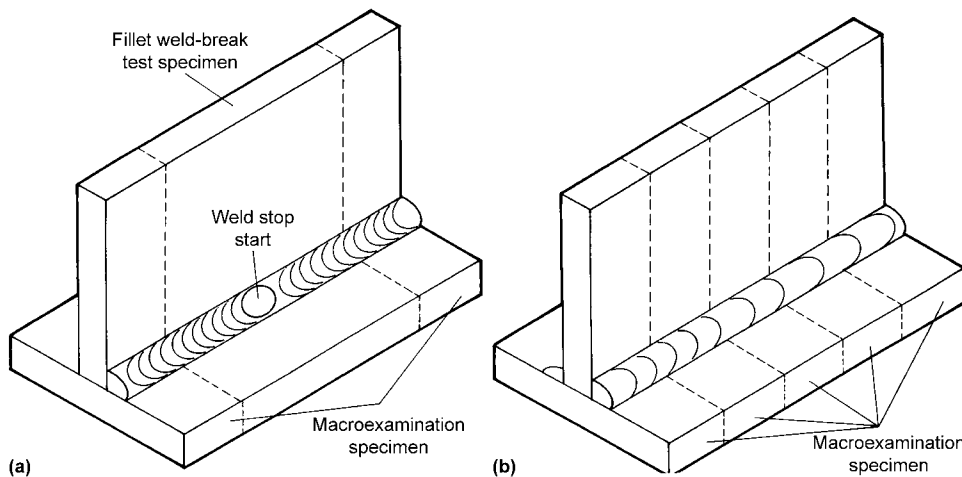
Two examples of T-joint weldments for fillet weld qualification. (a) Fillet weld on one side of T-joint. (b) Fillet weld on both sides of T-joint
